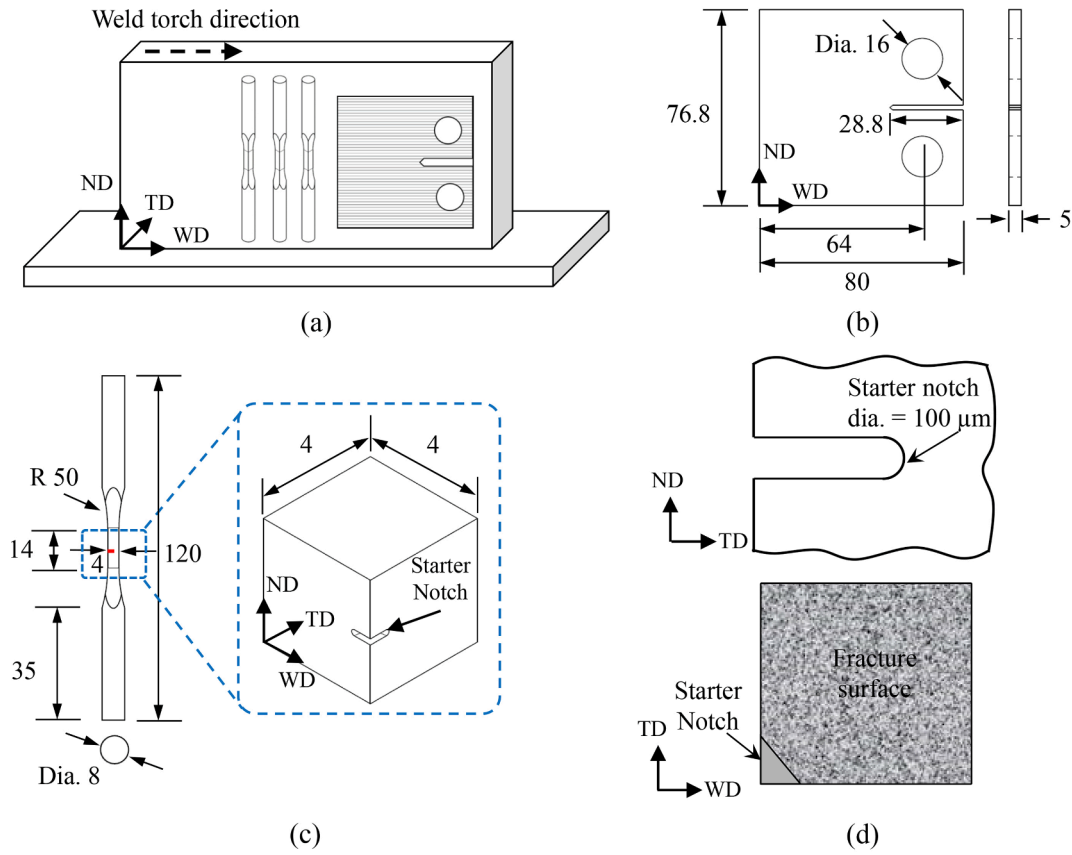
(a) Schematic of the WAAM Ti64 wall showing welding torch movement direction and sample extraction plan, (b) compact tension specimen for a long crack test, (c) small crack sample and starter notch, (d) the starter notch. [WD: welding torch movement direction, TD: transverse (thickness) direction, ND: normal direction. Unit: mm, not to scale.]
